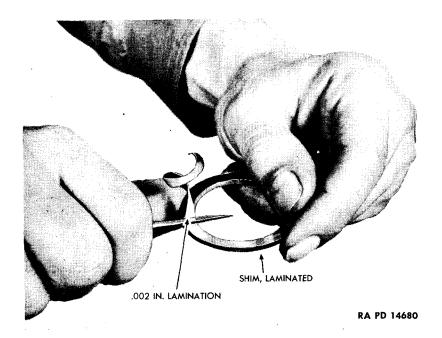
Peeling Worm Wheel Shaft Laminated Shim
